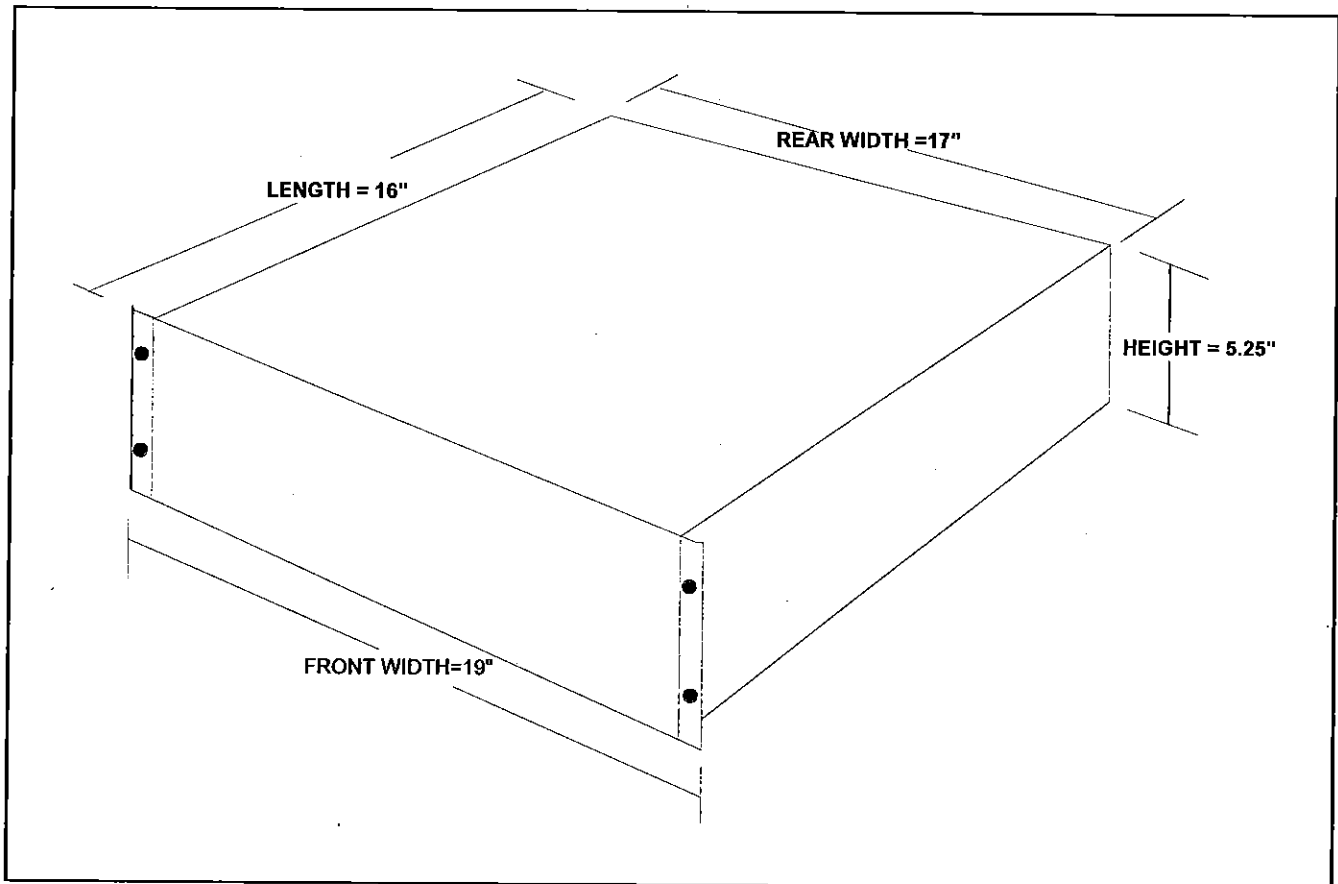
AEM RACK MOUNT OVERALL DIMENSIONS
